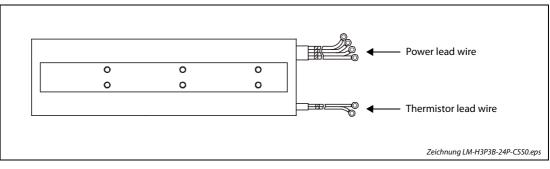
Servo motor series LM-H3 (Primary side – coil)
